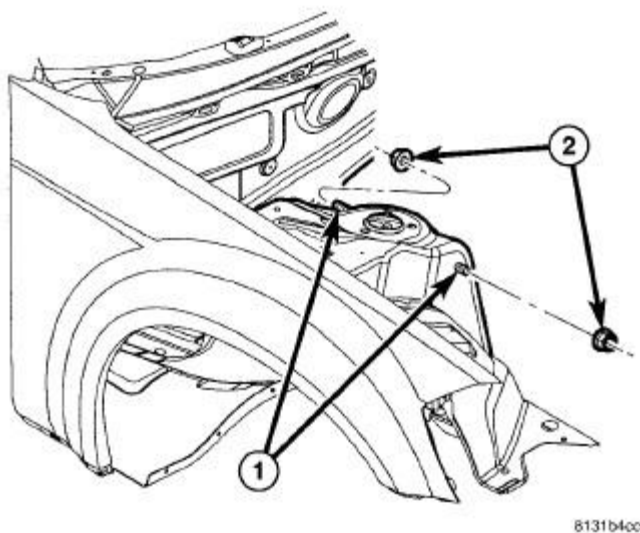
UPPER CONTROL ARM MOUNTING NUTS
